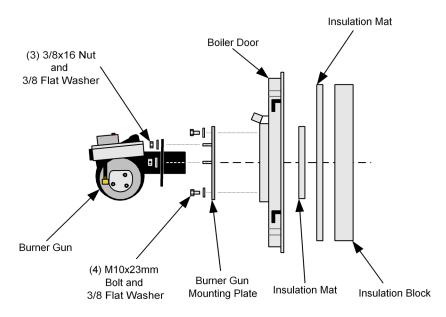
OWB-25, OWB-35 and OWB-50 Burner Mounting & Boiler Door Detail
